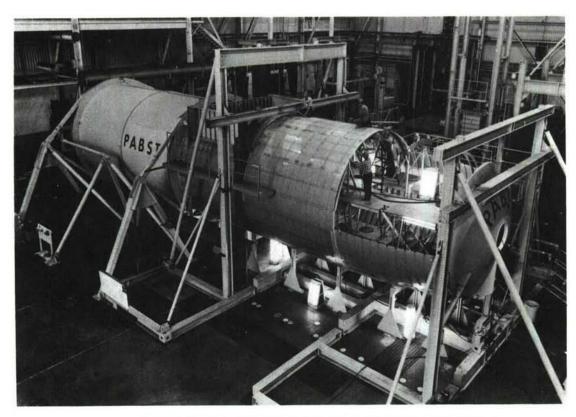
FLOOR PLANK AND INTERNAL PLATFORM INSTALLATION
